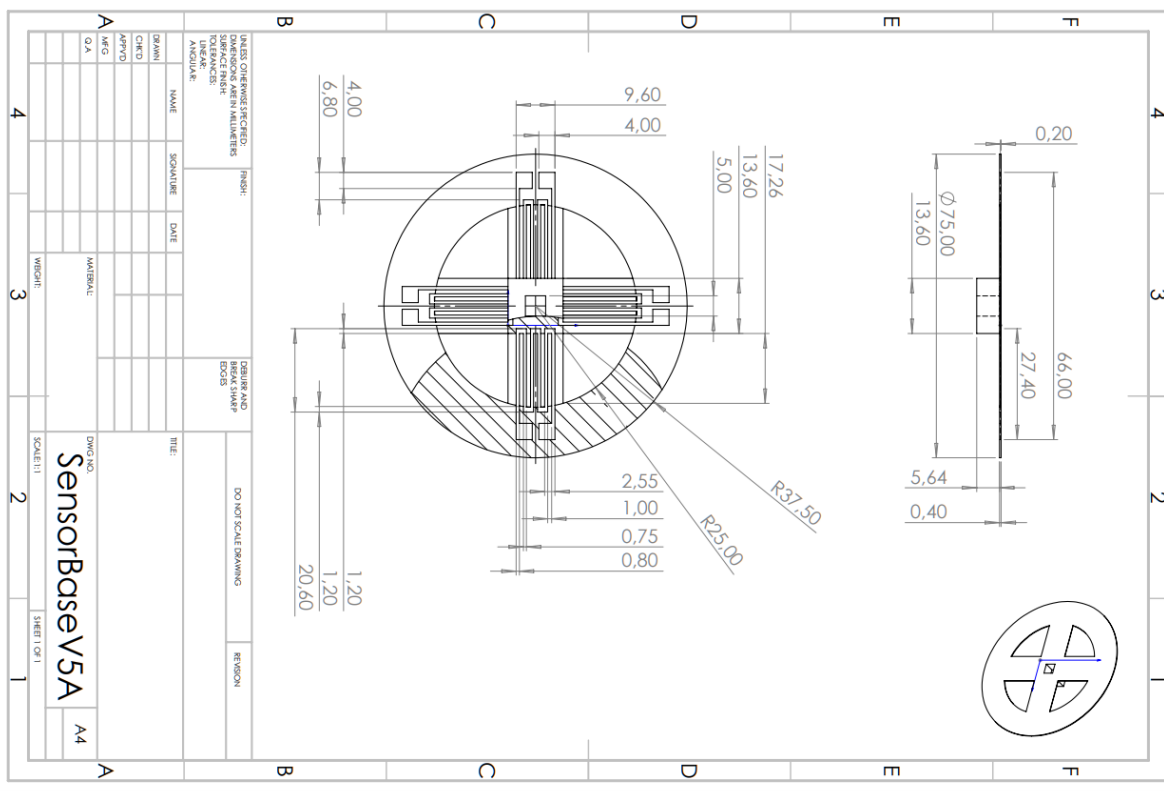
Technical drawing of the fifth (and final) version of the Sensor Base, size A.
